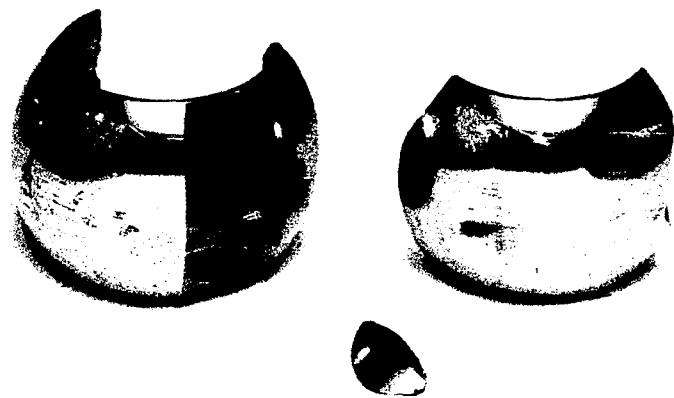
Close-up View of Fractured Drilled-Ball Segments – Drilled-Ball Bearing S/N 2600A-1
